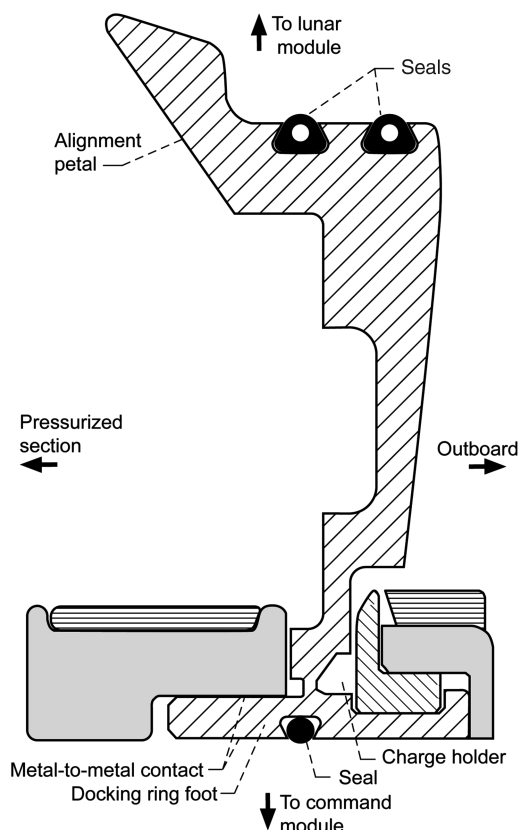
Section view of Apollo/Skylab 3 command module docking ring (Apollo drawing V36-316290).
